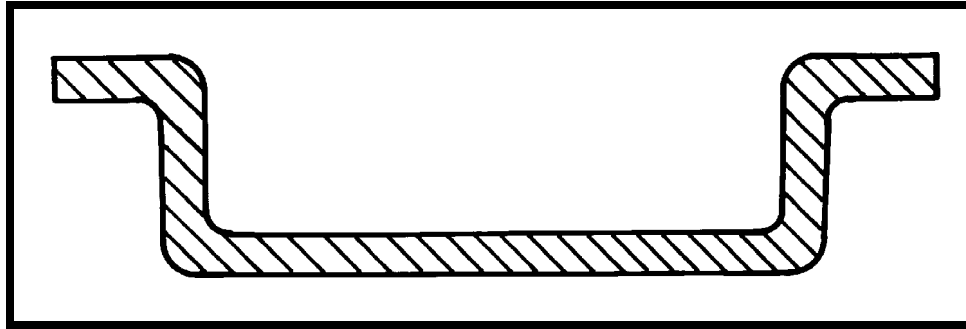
A correctly formed part produced in a die such as shown in Figure 3. Die clearances, die geometry and stock specifications must be correct to produce properly formed stampings. *Smith & Associates
